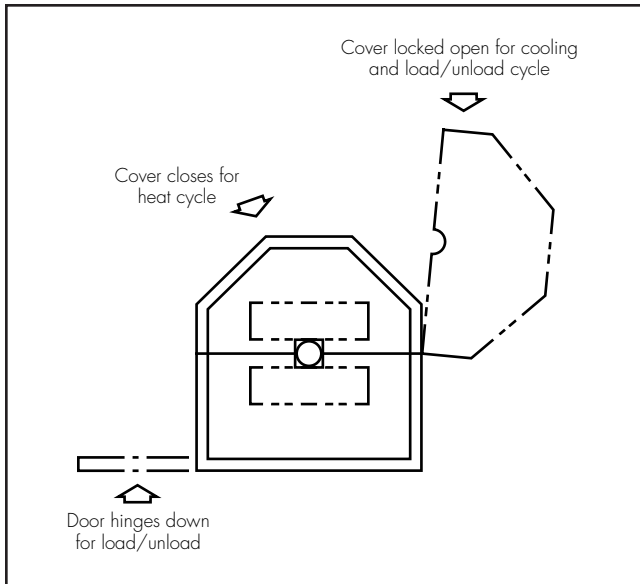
Single-station machine with an oven (clamshell machine).
